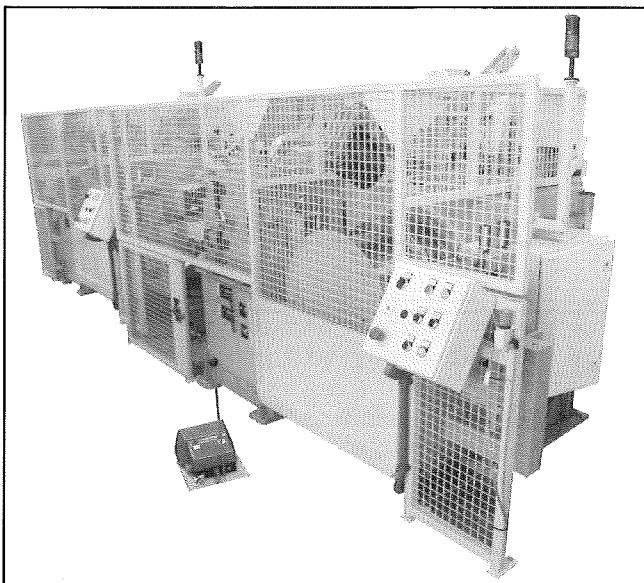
KIESELSTEIN "shaving line" for copper wire in magnetic wire manufacturing.
